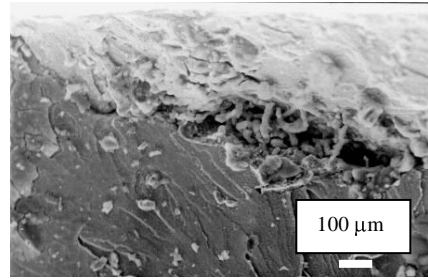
(B) Interface of trans-crystalline fracture of cross crack with brittle final fracture.
